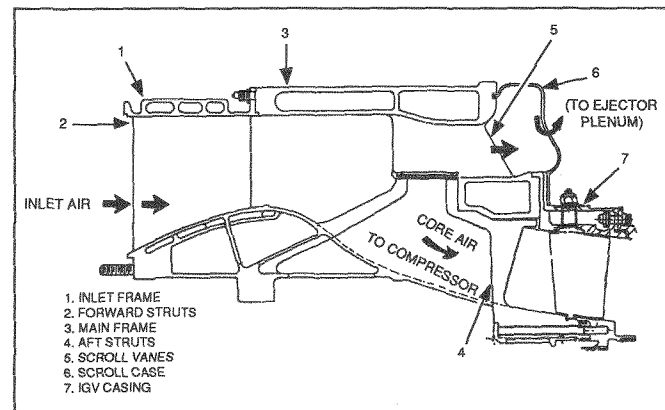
B Inlet Frame, Mainframe, IGV Casing Assembly
